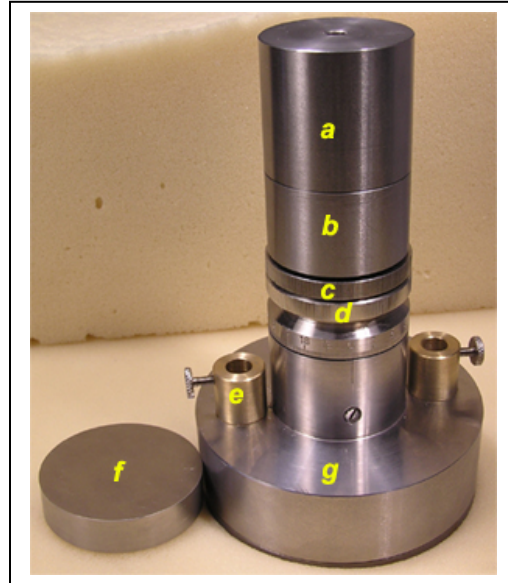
Overall view of PF-2-1 lapping and polishing Fixture
